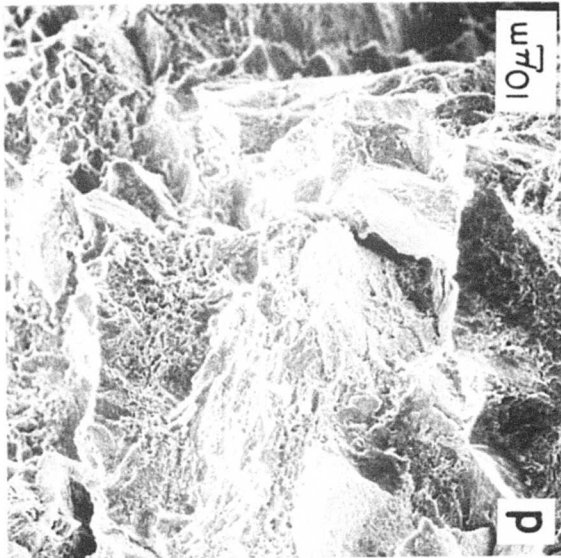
Alloy 334(10Mo-6Cr-2.5Al), sample 4CLY1. Solution treated 1350F-4 hr WQ, single aged 900F-96 hr. SEM of fracture surface: (a) X80, (b) X300, (c) X1500 - precrack/fast fracture transition, (d) X300 - fast fracture. YS(ksi): 186, RA(%): 23, K_Q(ksi/in): 86.
